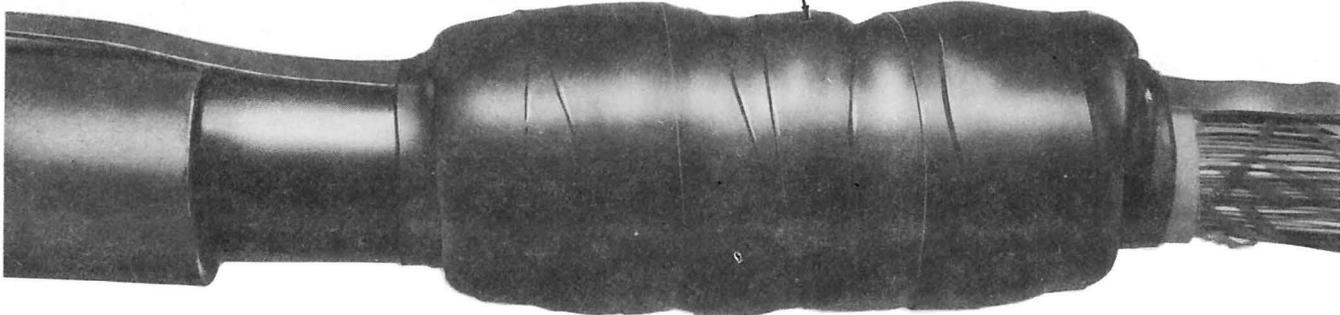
DR Tape Wrapped Around B Sealing Tape
